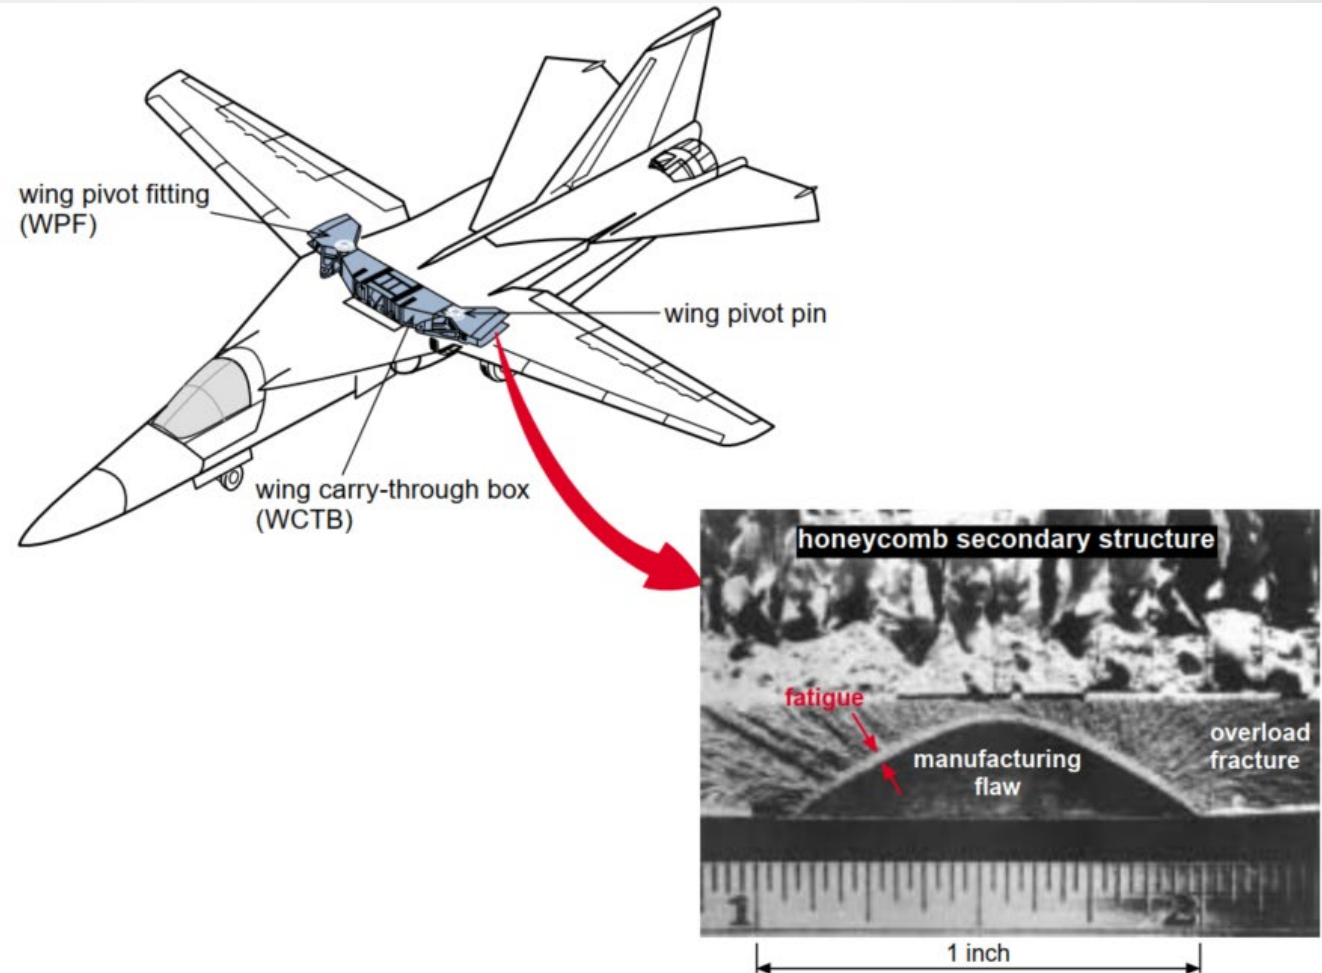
Failure origin of F-111 #94: a manufacturing flaw in the high-strength steel lower plate of the left-hand wing pivot fitting
